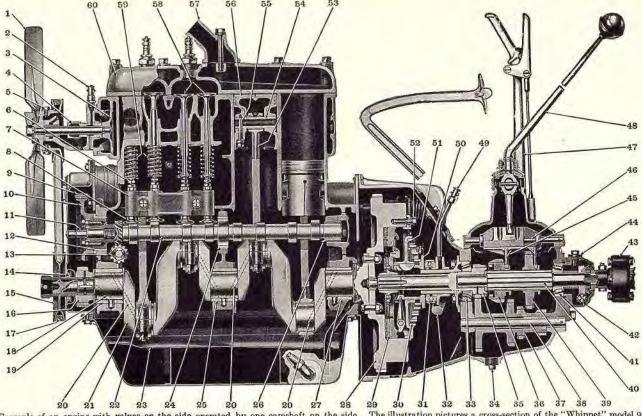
Example of an engine with valves-on-the-side operated by one camshaft on the side. The illustration pictures a cross-section of the "Whippet" model 96-A four-cylinder, L-type, cast in block engine with clutch, transmission and universal joint, termed a unit-power-plant. See specifications of Whippet engines on pages 1055-1062. Name of parts is given below.
